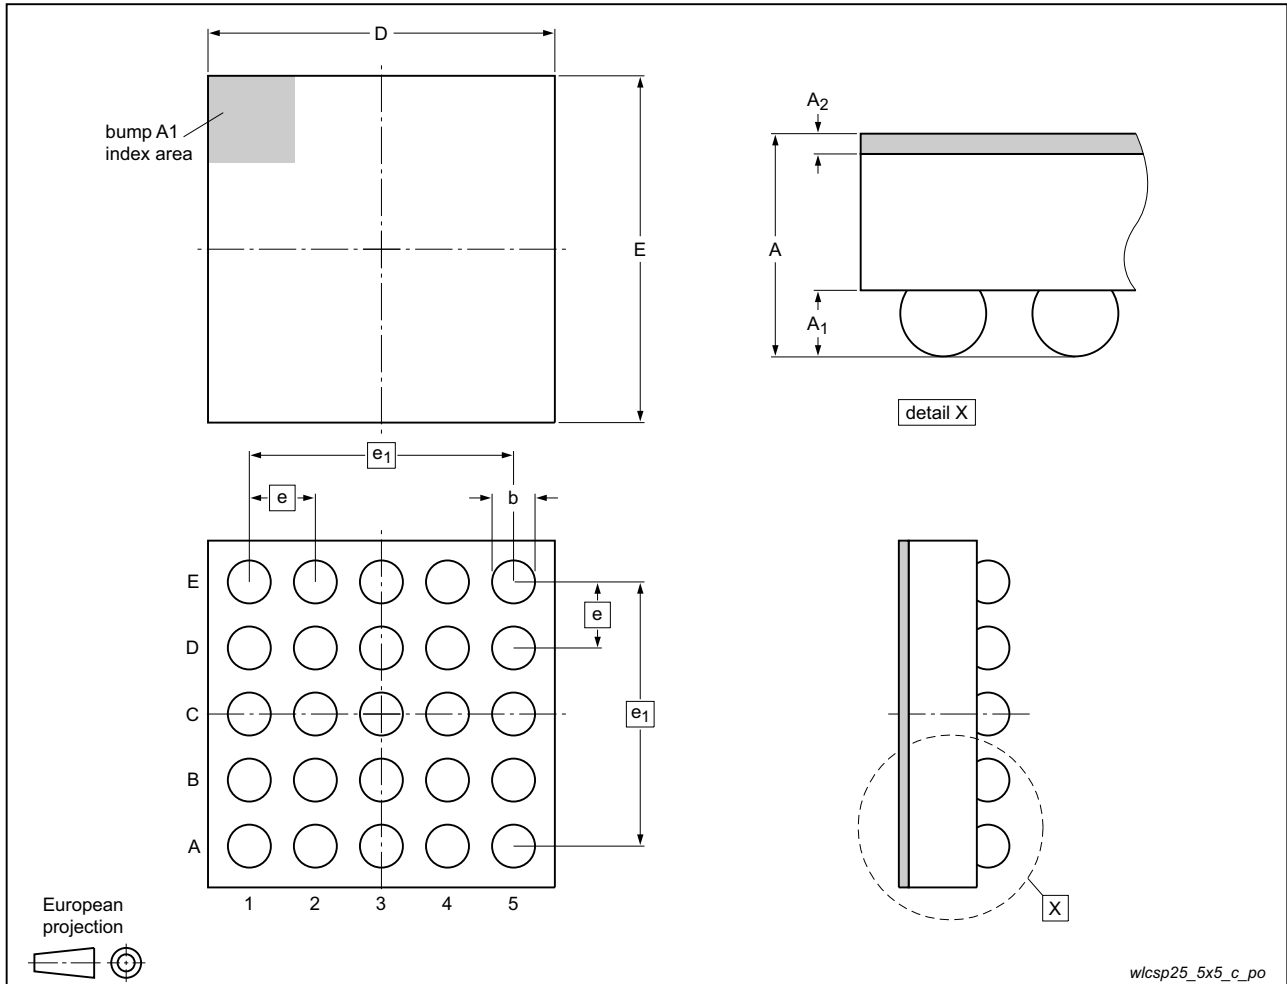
Package outline IP4856CX25/C (WLCSP25 with back side coating)
